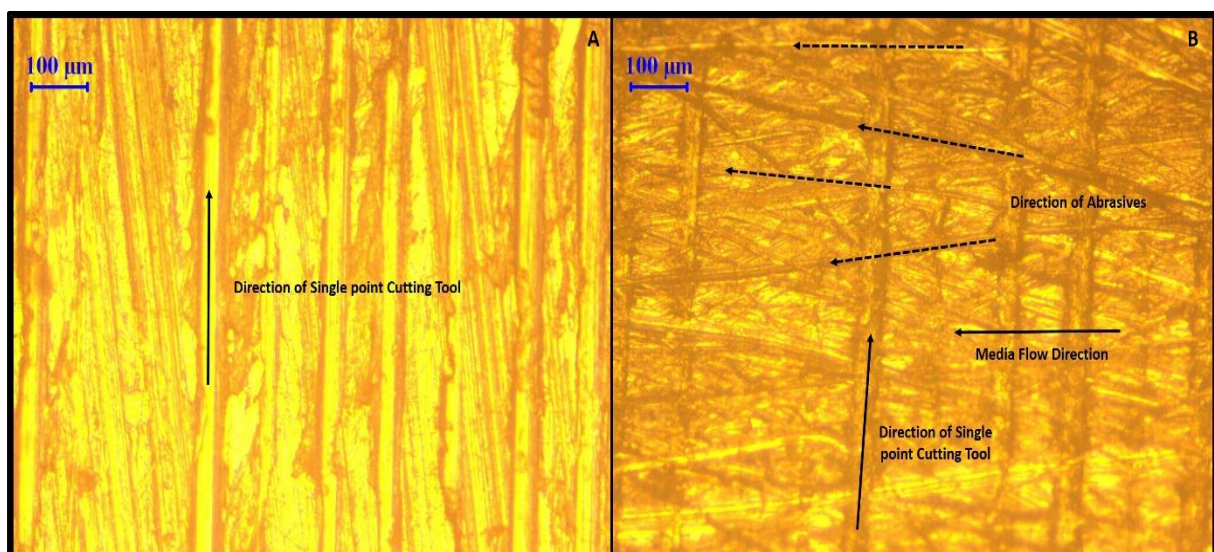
Leica microscopic images for side surface of (a) Unfinished workpiece, and (b) Finished workpiece at 10× zoom
